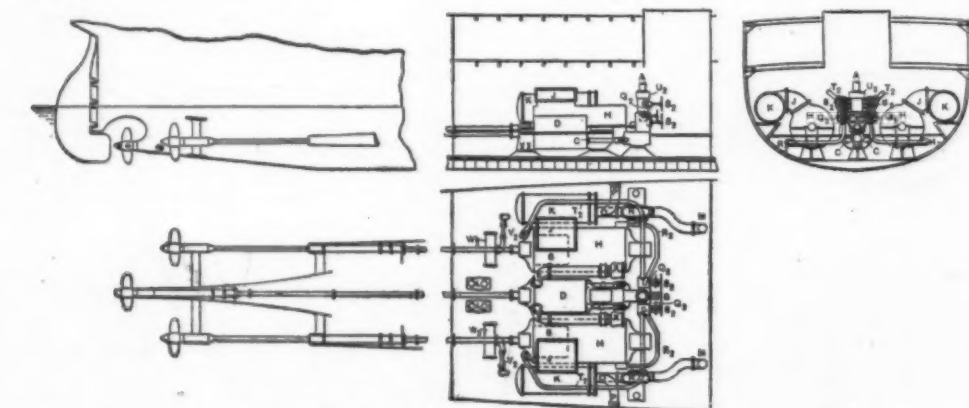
THREE-SHAFT ARRANGEMENT OF TURBINE MACHINERY.
